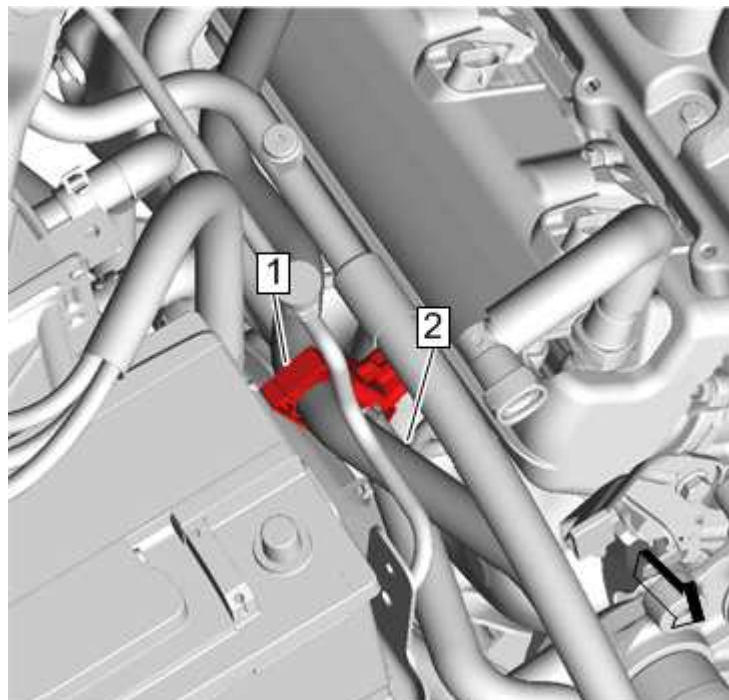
Heater Inlet Hose At Heater Inlet and Outlet Hose Bracket
